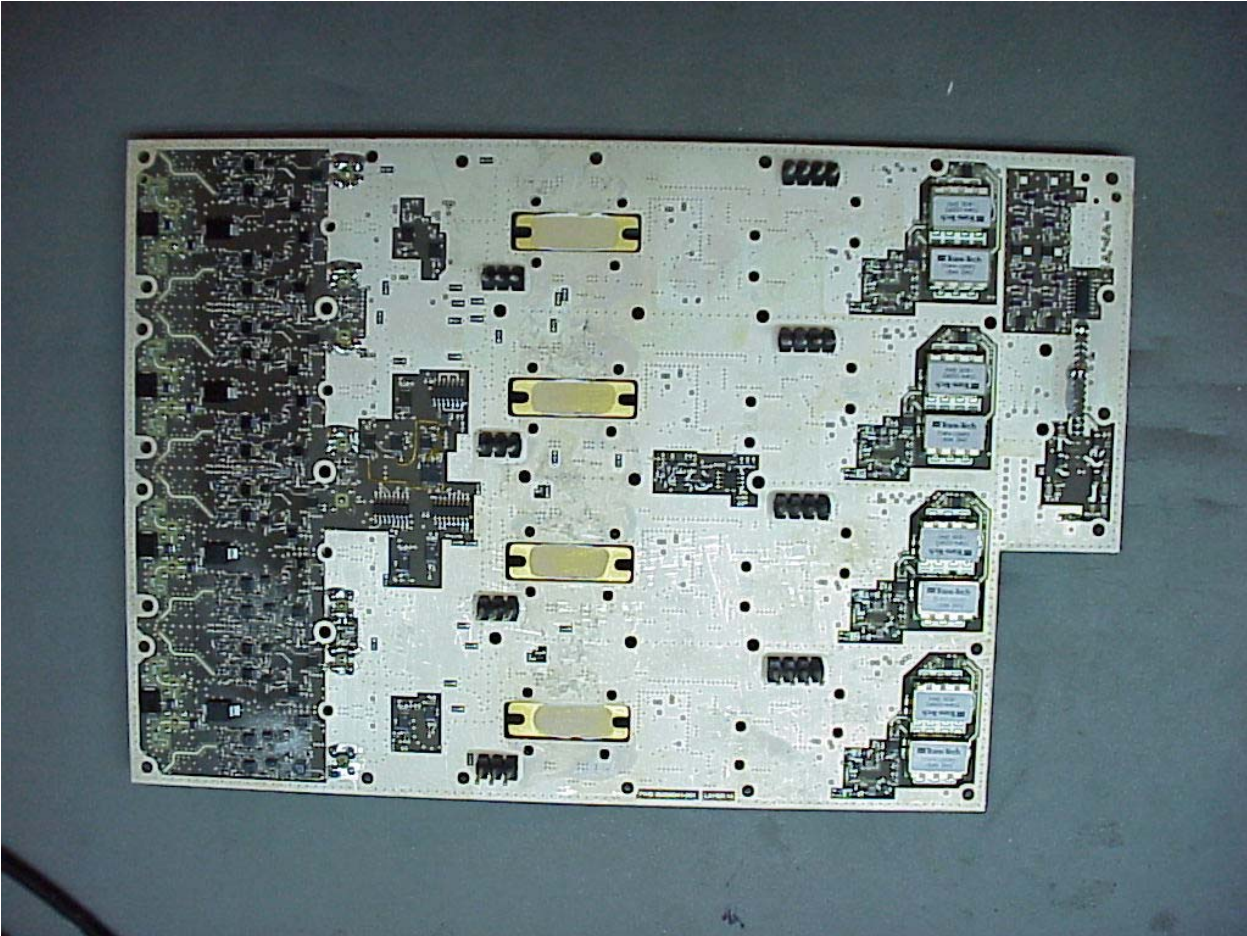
Back Side View of A4 Transmitter Assembly, Cover Removed
